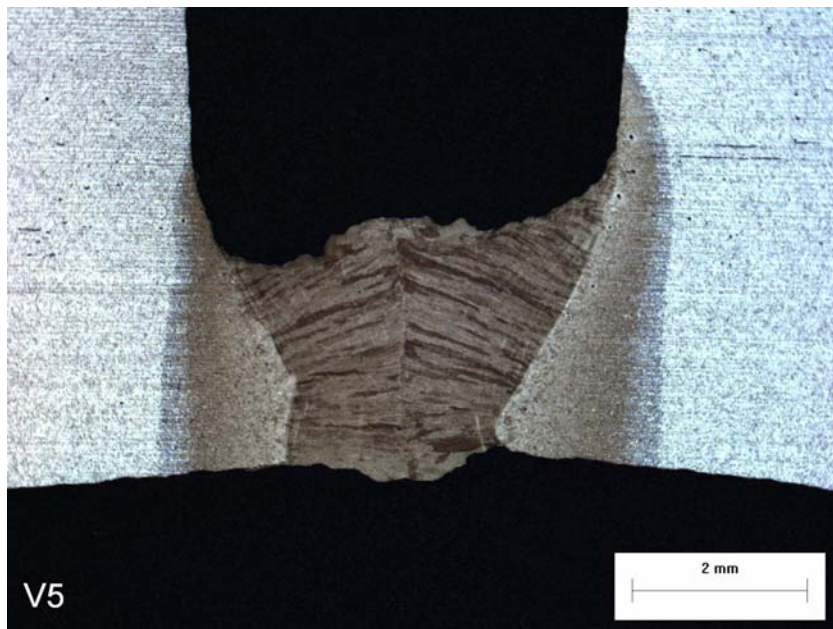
Macrosection of GMAW-VP Weld V5
